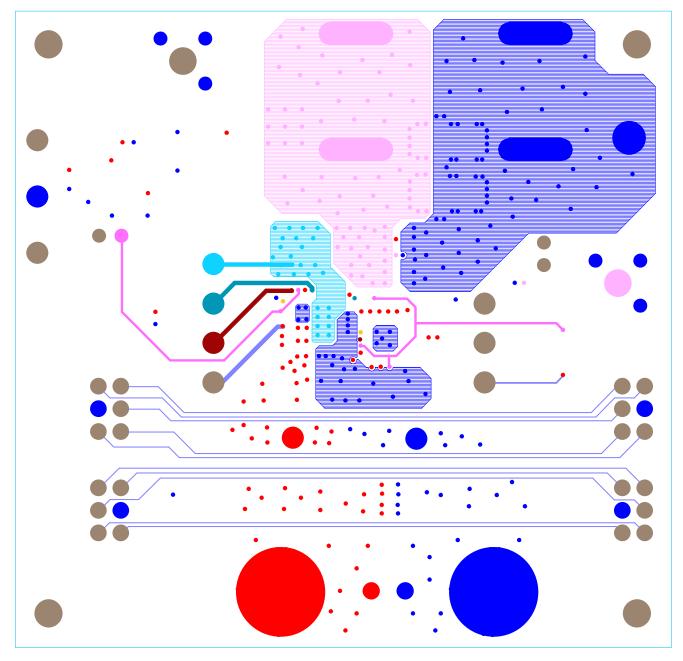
PCB - INNER LAYER 3 (TOP VIEW)
